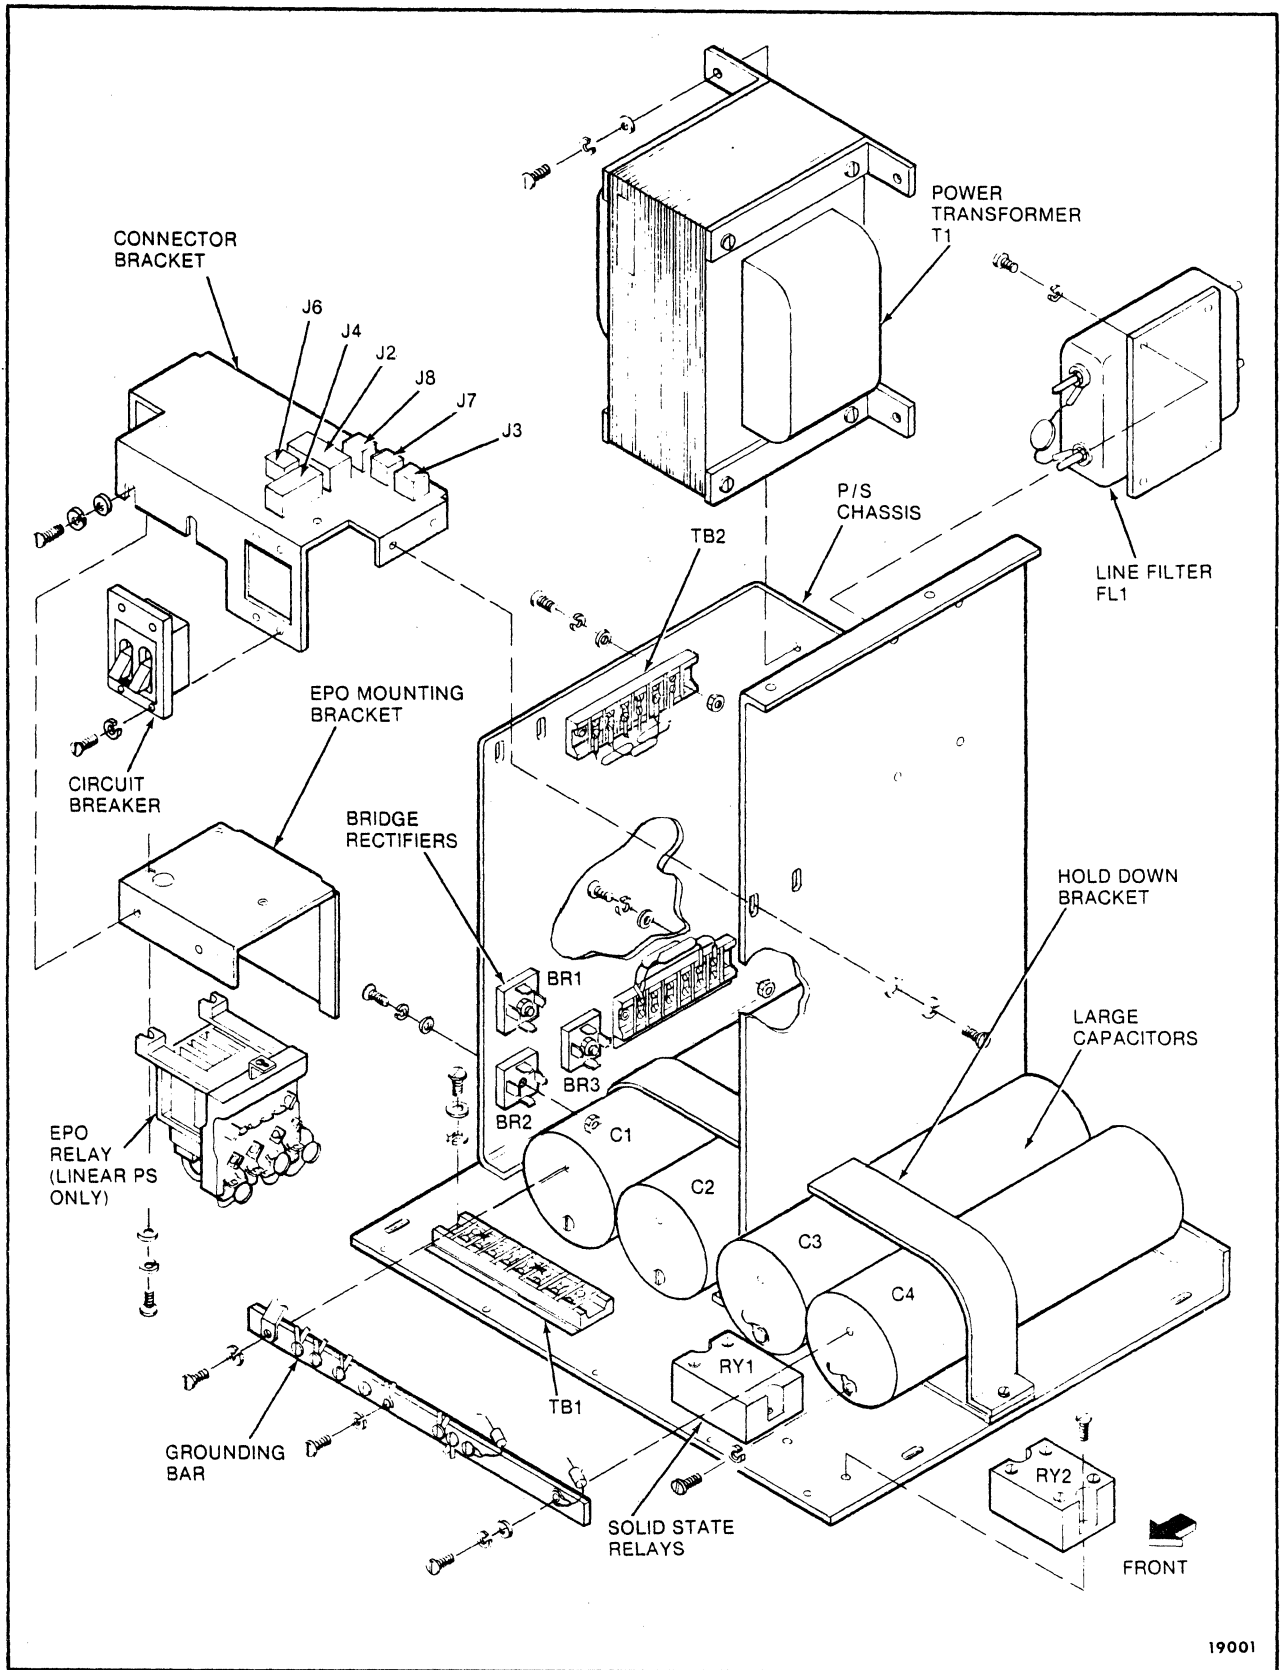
Power Supply Assembly (Sheet 1 of 2)
